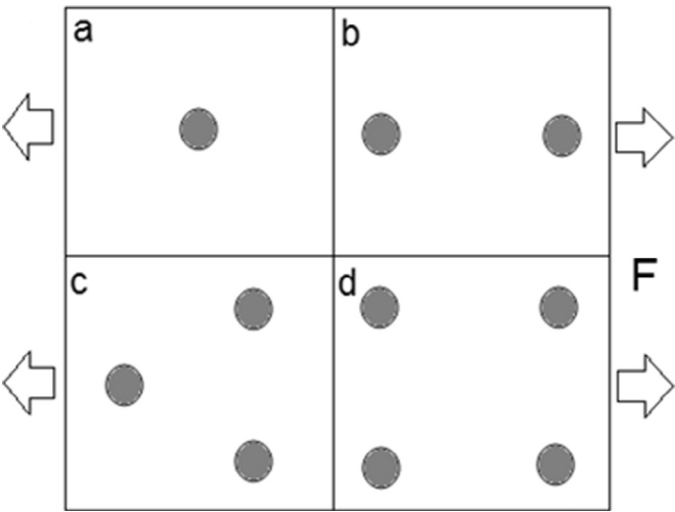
Spot welds in 60 mm space and 30 mm to edges for all MSW specimens.
